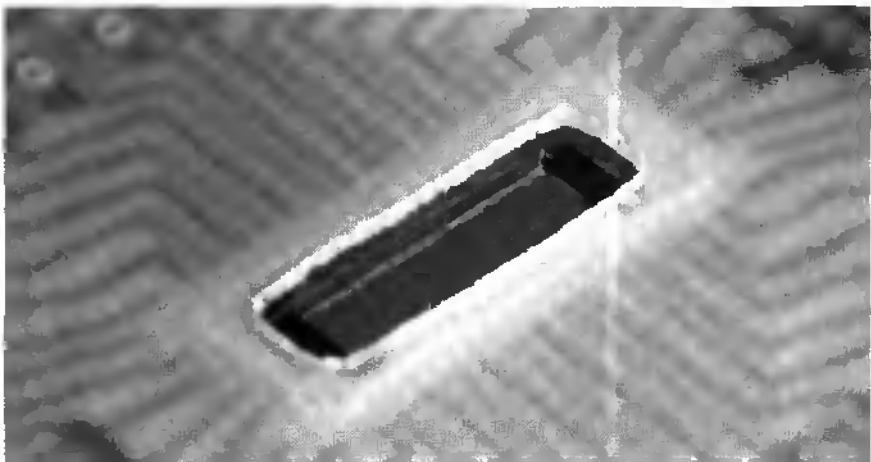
Optical view of the PCB backside. A rectangular hole enables to have a direct access to the membrane.
